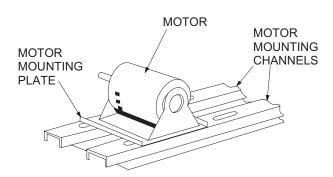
LA300/LB360/LB480 MOTOR LOCATION A
